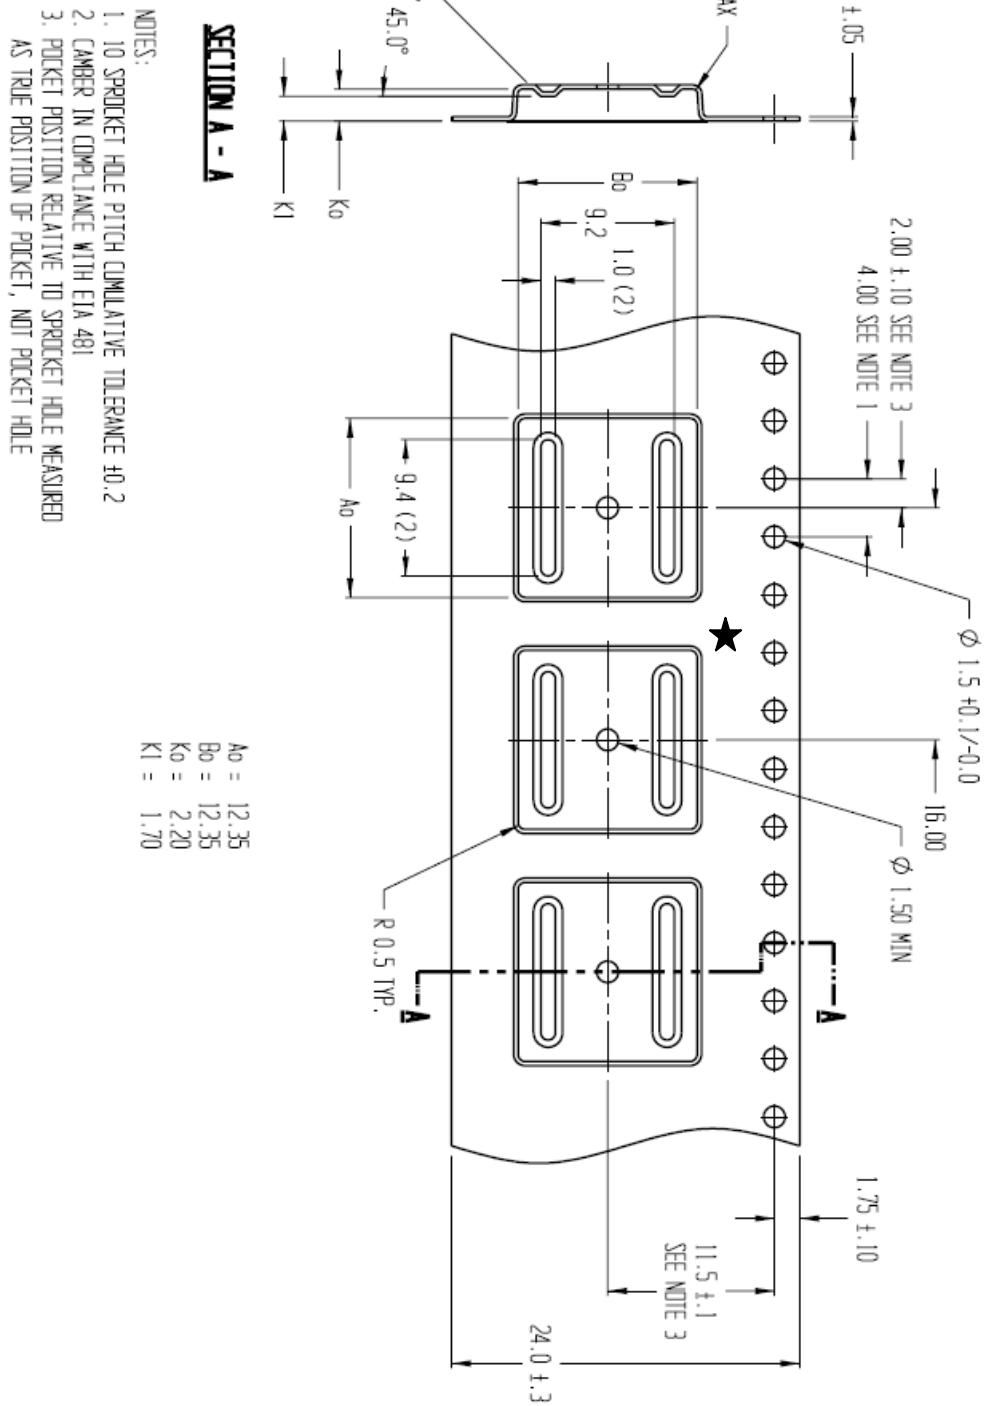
VNC2 – LQFP-64 Carrier Tape Dimensions
